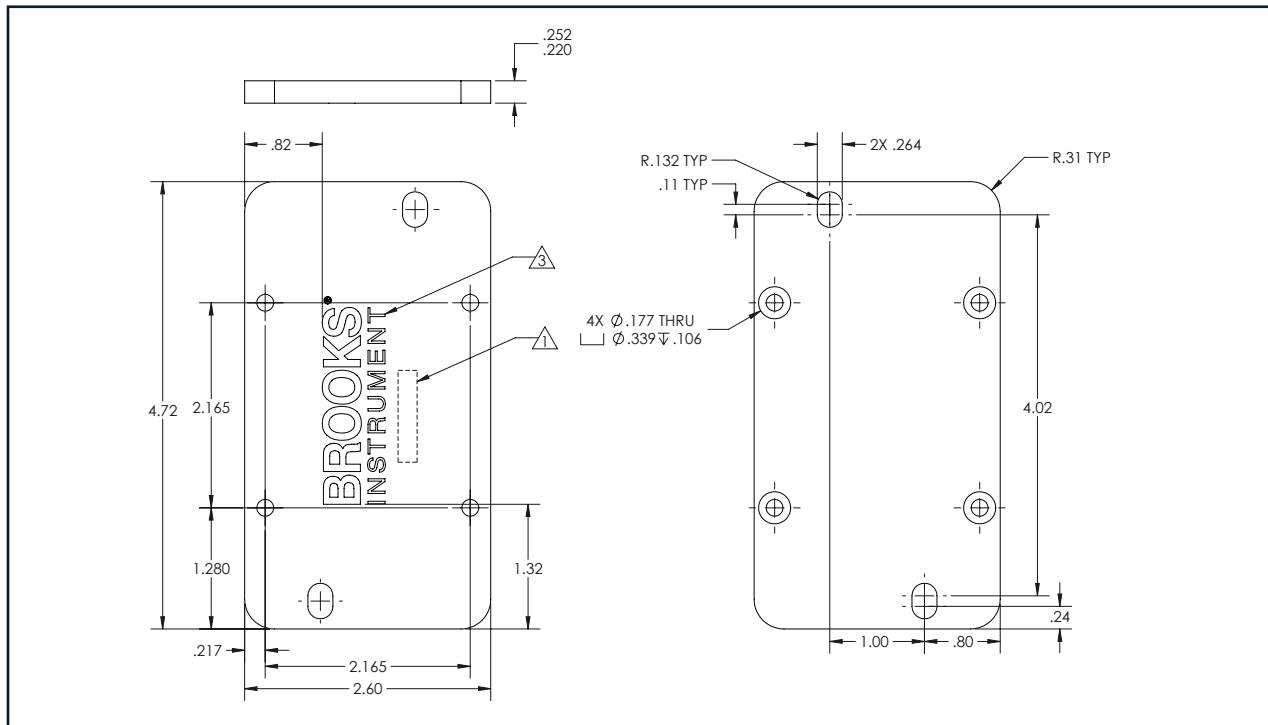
Dimensional Drawing BCU, Mounting Plate
